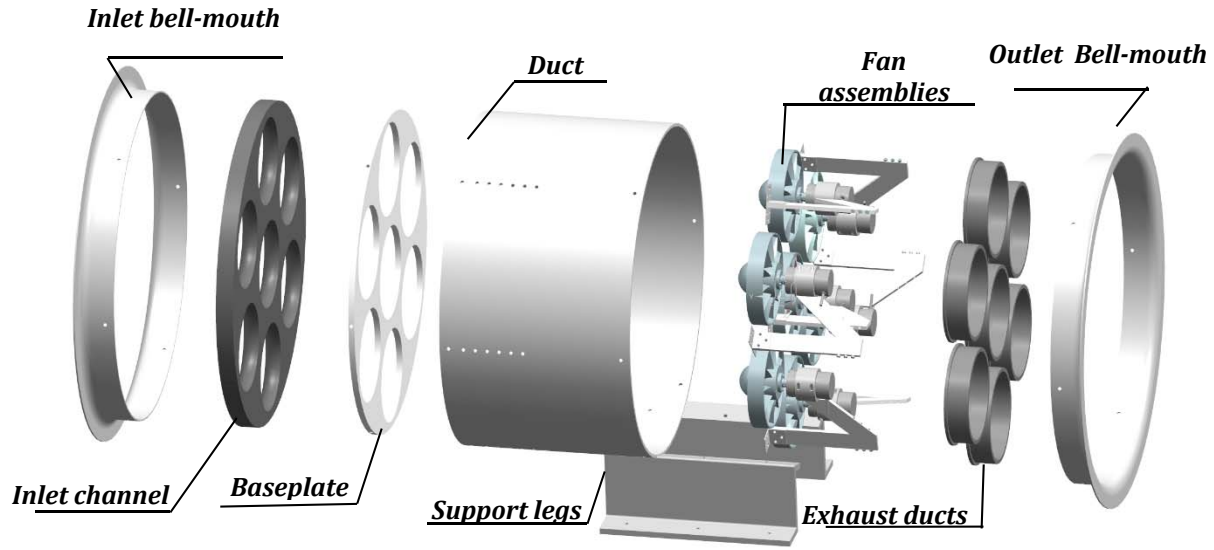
Exploded view of VTFA unit (duct diameter 0.68 m).
